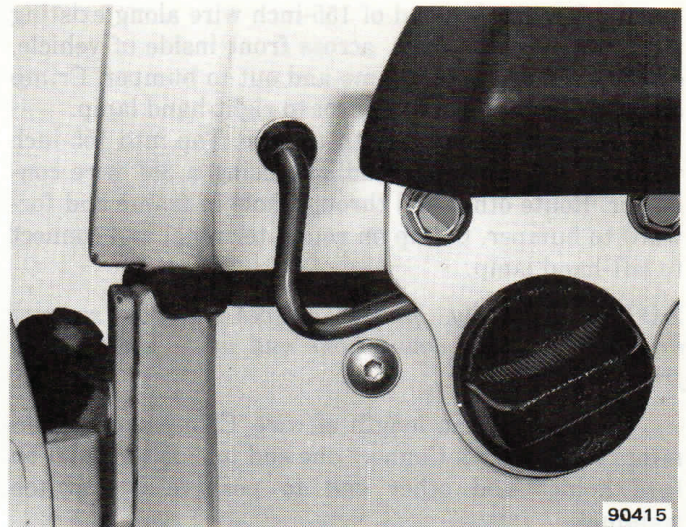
Plastic Sleeve Secured at Bottom of Windshield Frame
